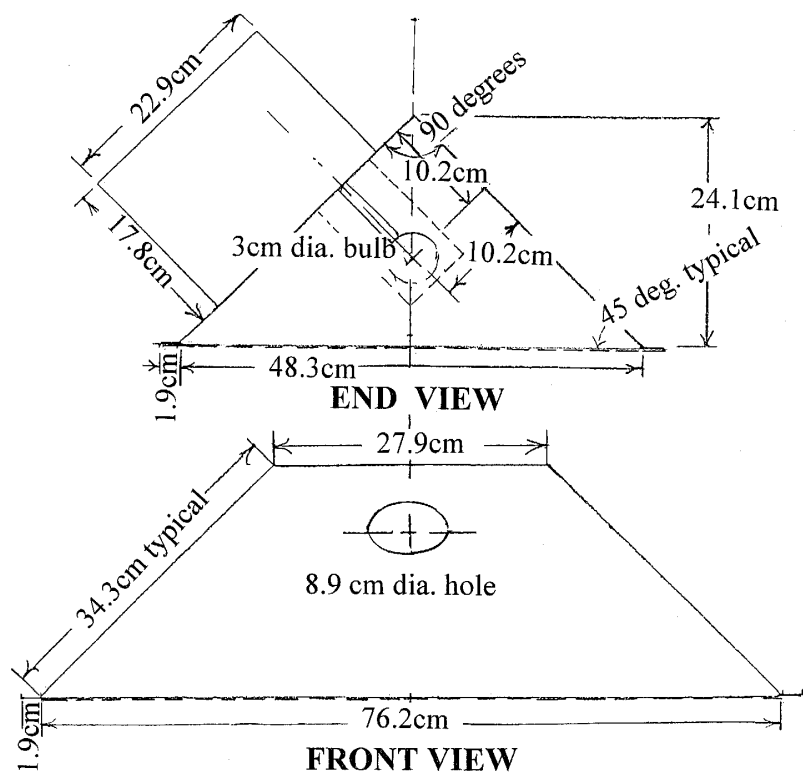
Schematic of polished stainless steel reflector used to mount a 1000 W microwave-powered sulfur (MPS) lamp (LIGHTDRIVE™ 1000, formerly called SOLAR 1000™ lamp) in the light cap. End view shows the lamp assembly mounted on a fabricated reflector. A secondary screen of galvanized hardware cloth (5 mm × 5 mm grid) was mounted on a 1.9 cm flange around the bottom of the reflector.
